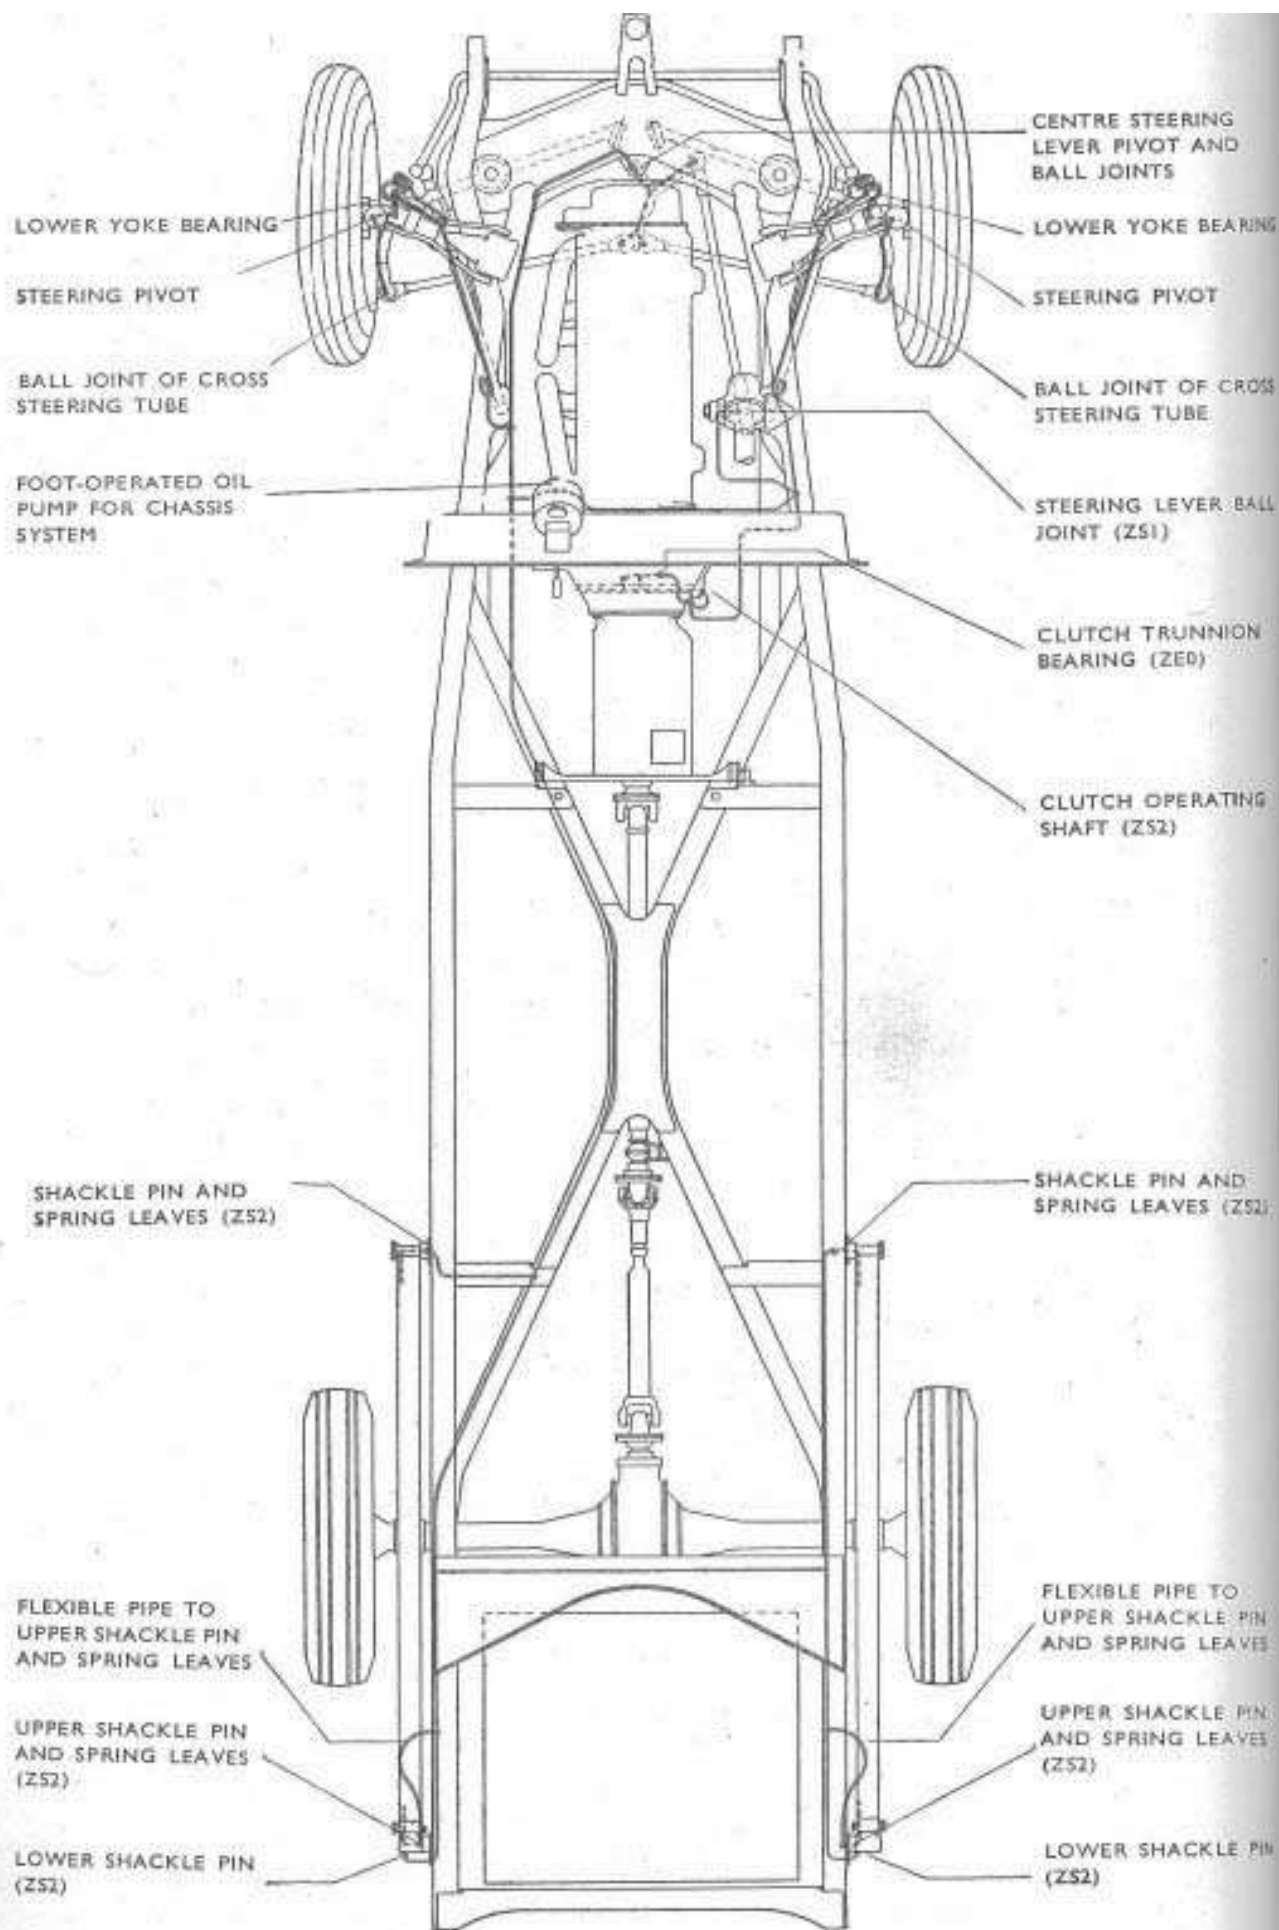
DIAGRAM OF CHASSIS LUBRICATION SYSTEM.
